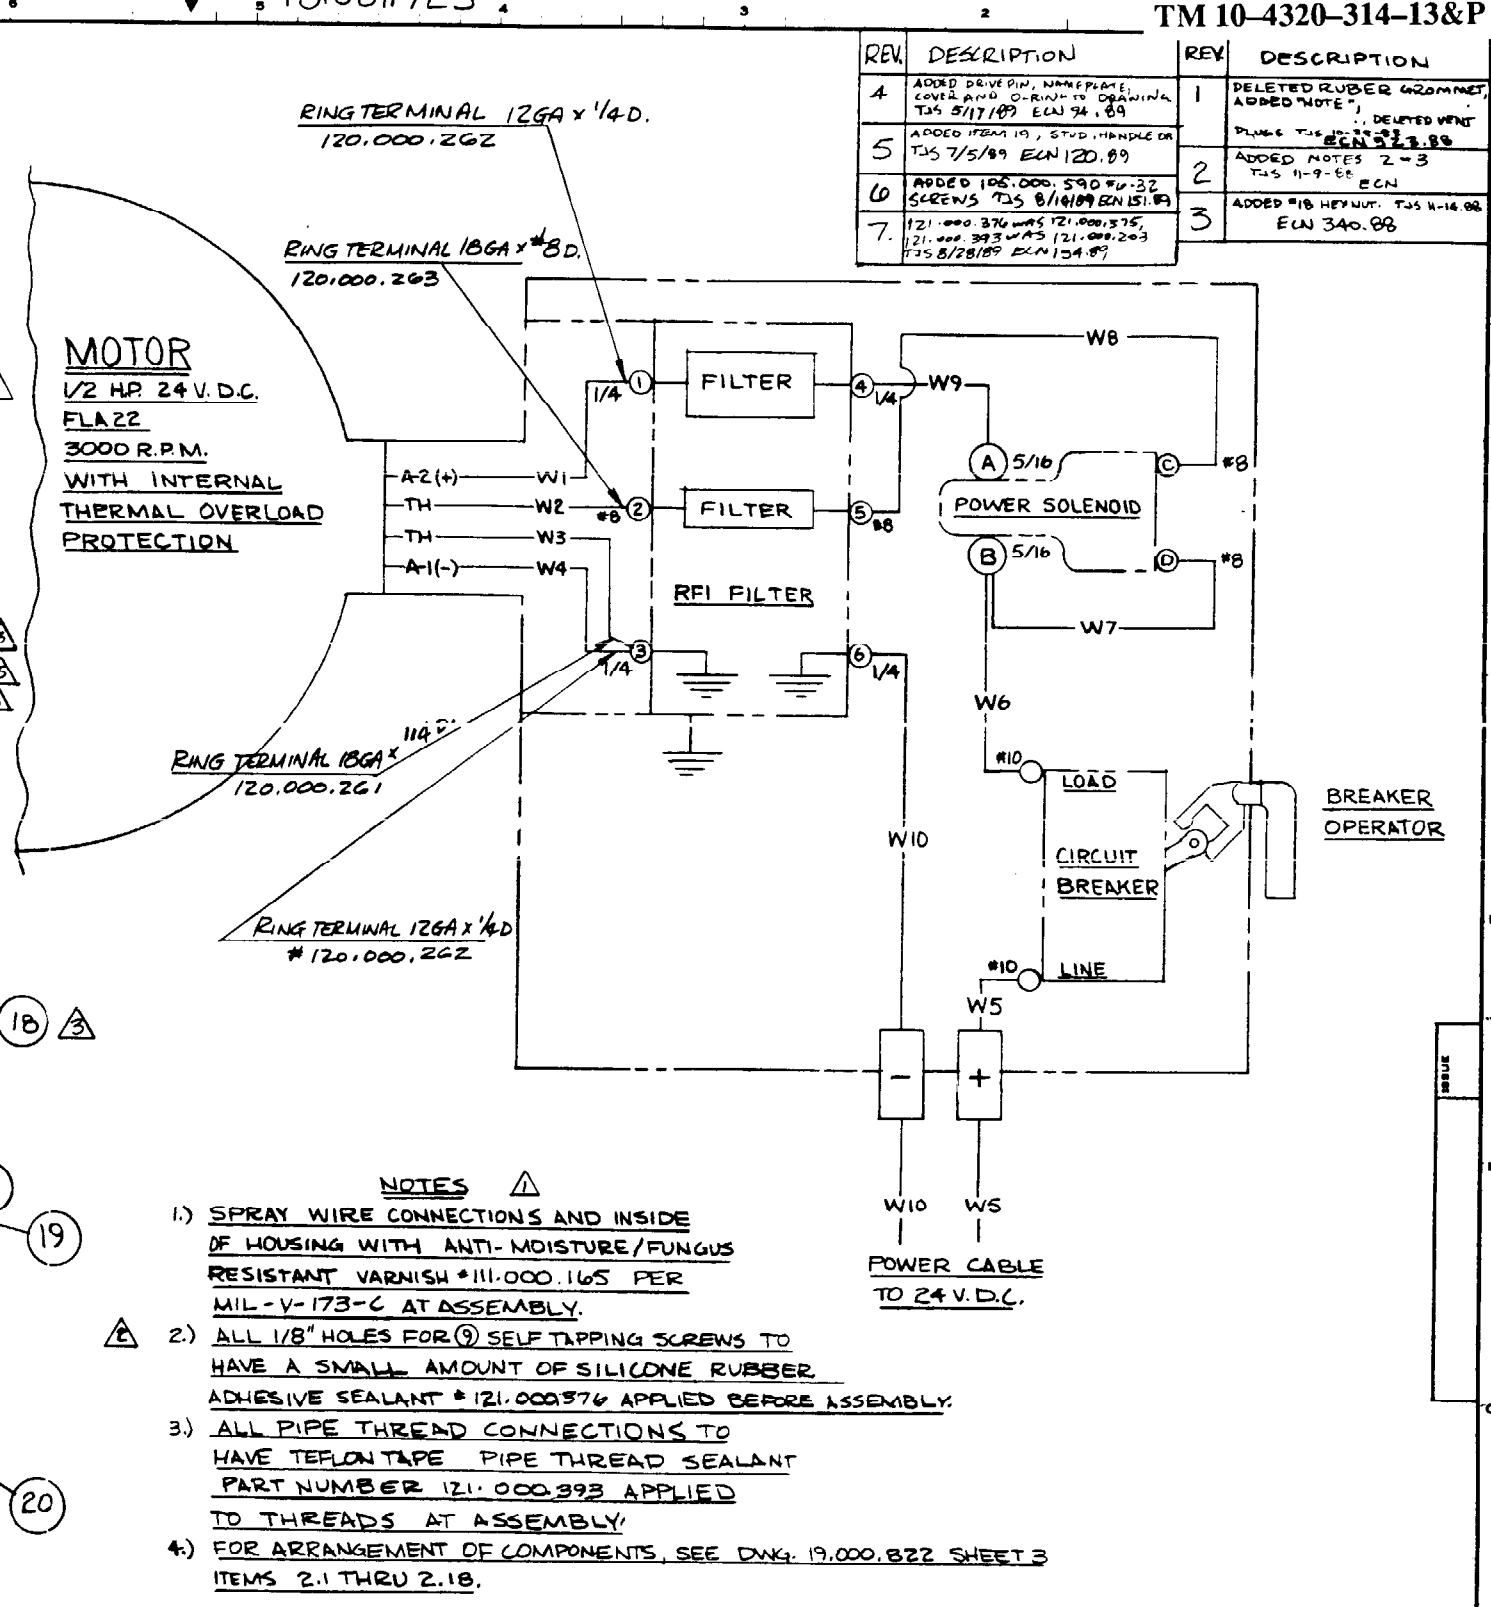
Centrifugal Pump Unit (Sheet 3 of 3)
